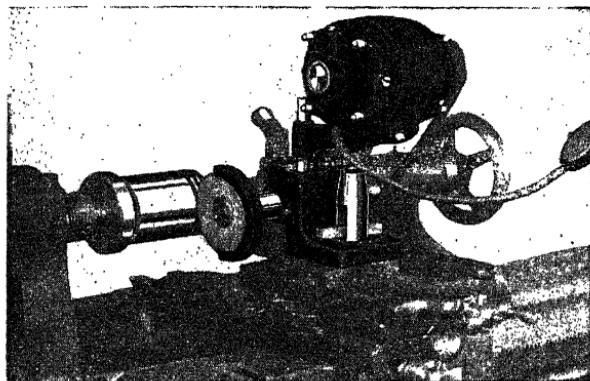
Using a Tool Post Grinder for Grinding Piston in Lathe
